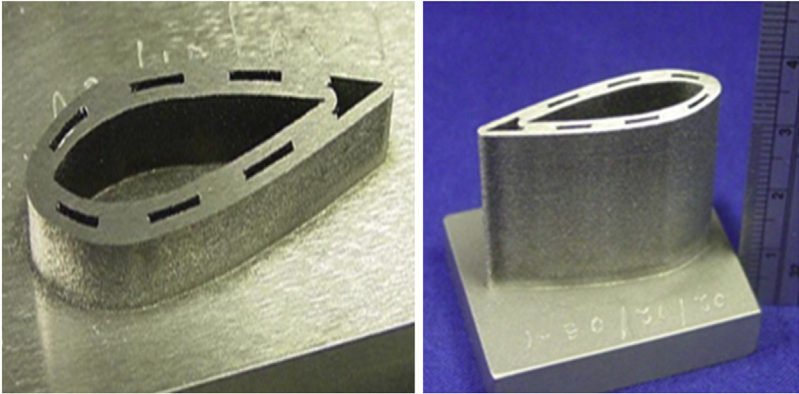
Ti-6Al-4V airfoils with embedded cooling channels built using the laser metal deposition process.
